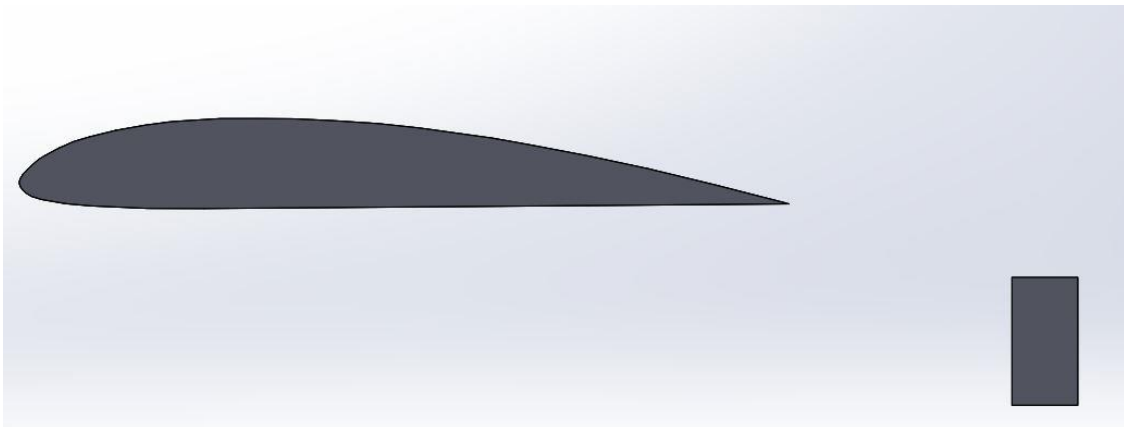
CAD design of rectangular bar addition as improvised during manufacturing of the UAV
